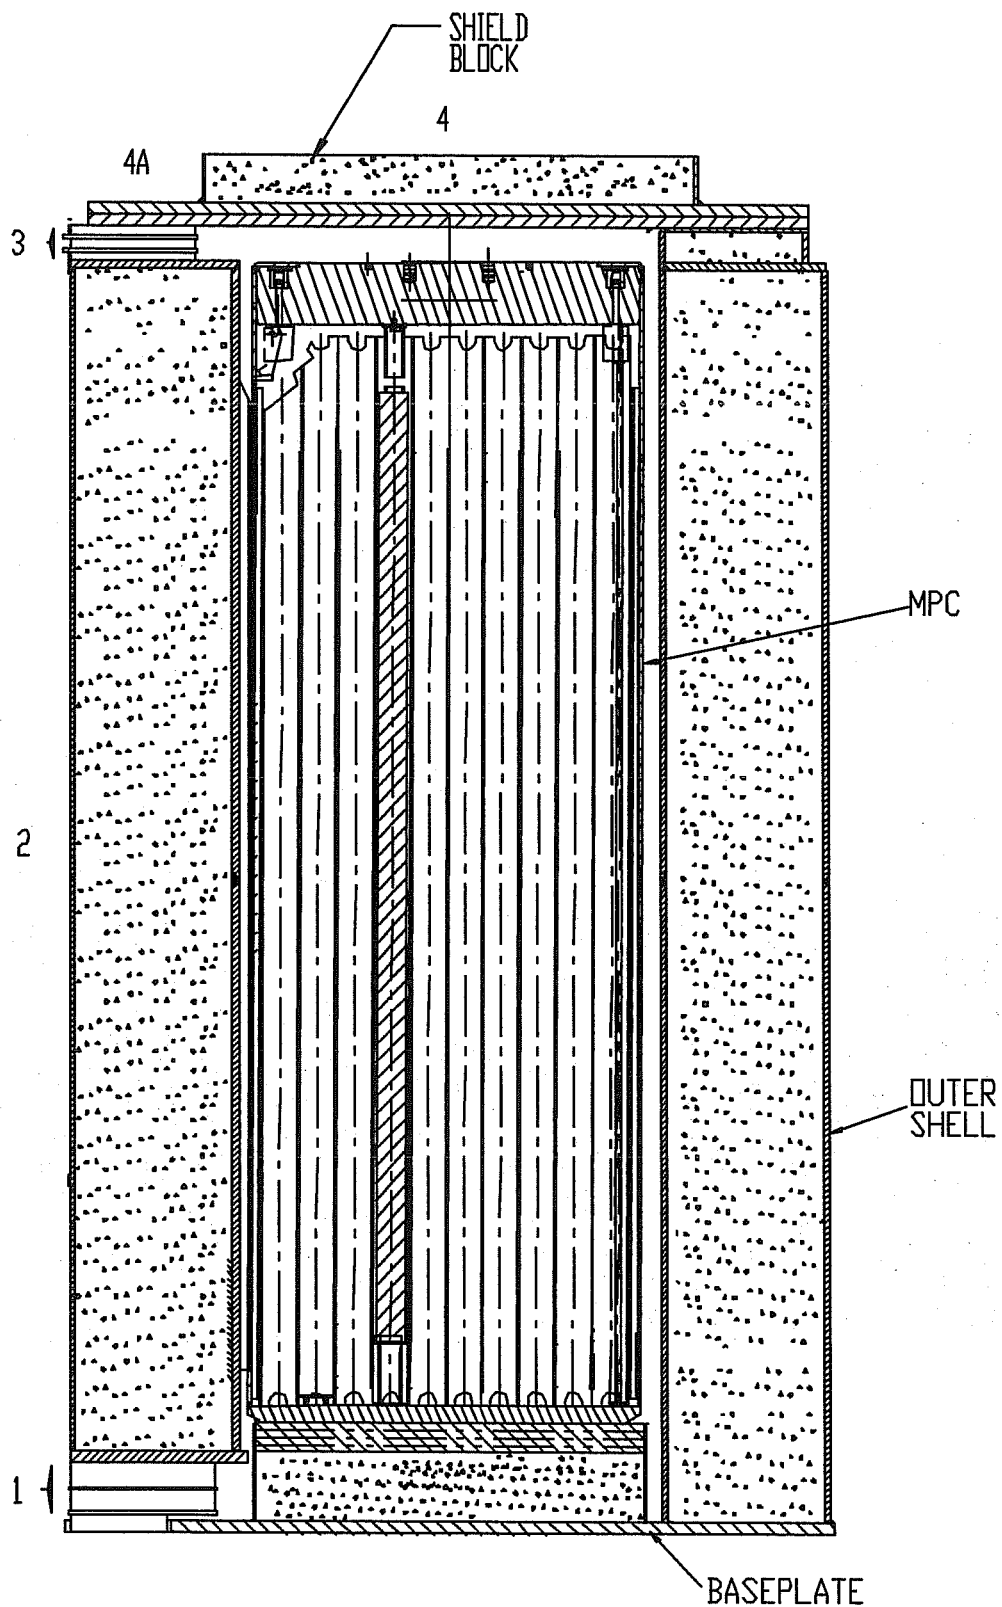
; CROSS SECTION ELEVATION VIEW OF THE HI-STORM 100S OVERPACK WITH DOSE POINT LOCATION
